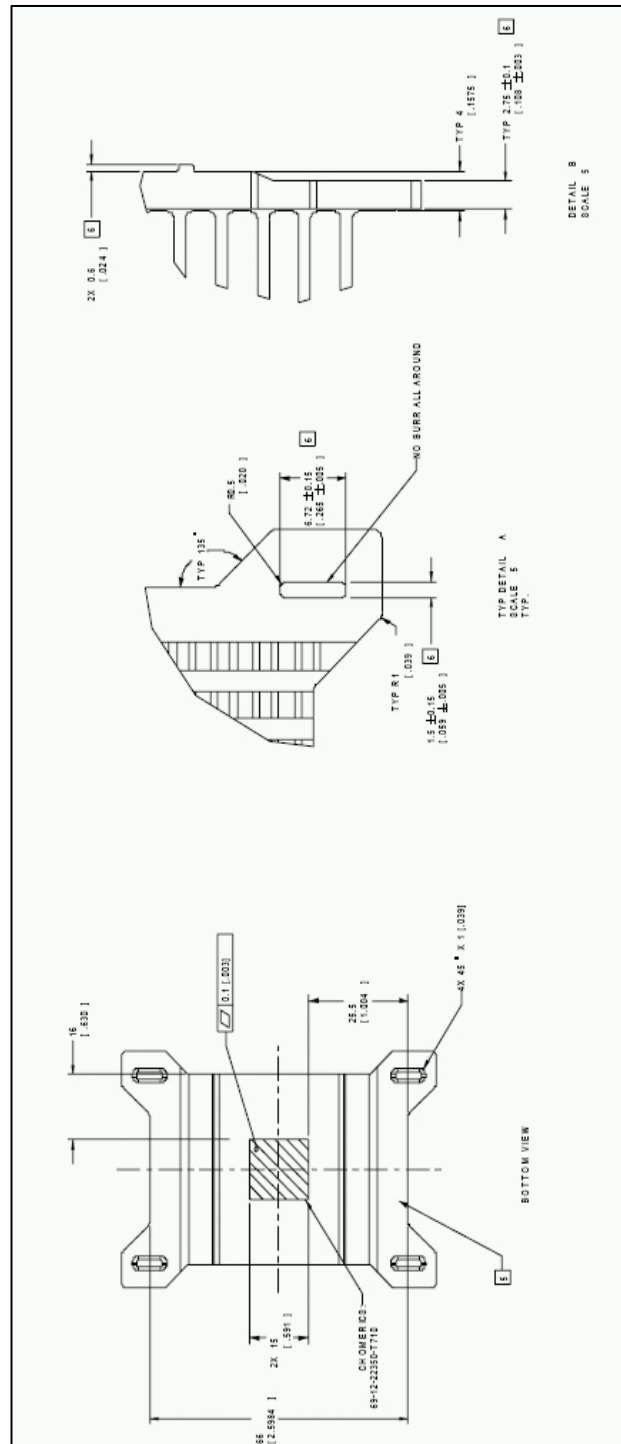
MCH Heatsink for ATX Platforms - Anchor
